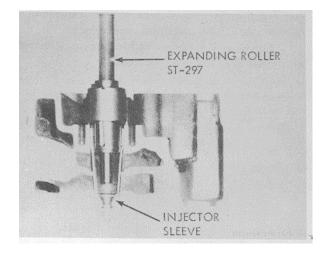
Sealing upper end of injector sleeve with ST-297.
